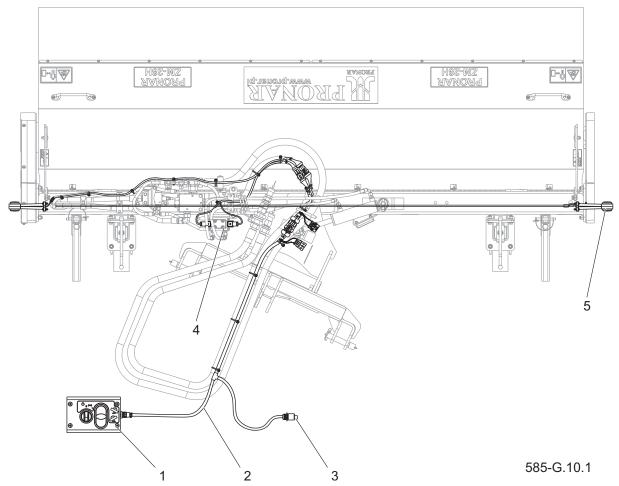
Electric system design for the independent steering and clearance lighting version
